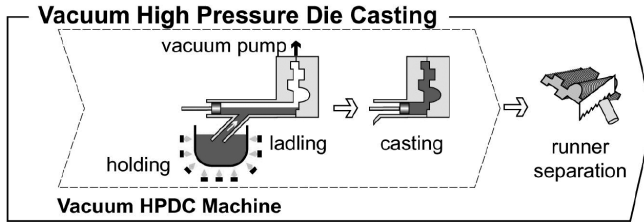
Schematic drawing of a Vacu-HPDC machine, showing the connecting riser rod between sleeve and furnace, and the vacuum line.
